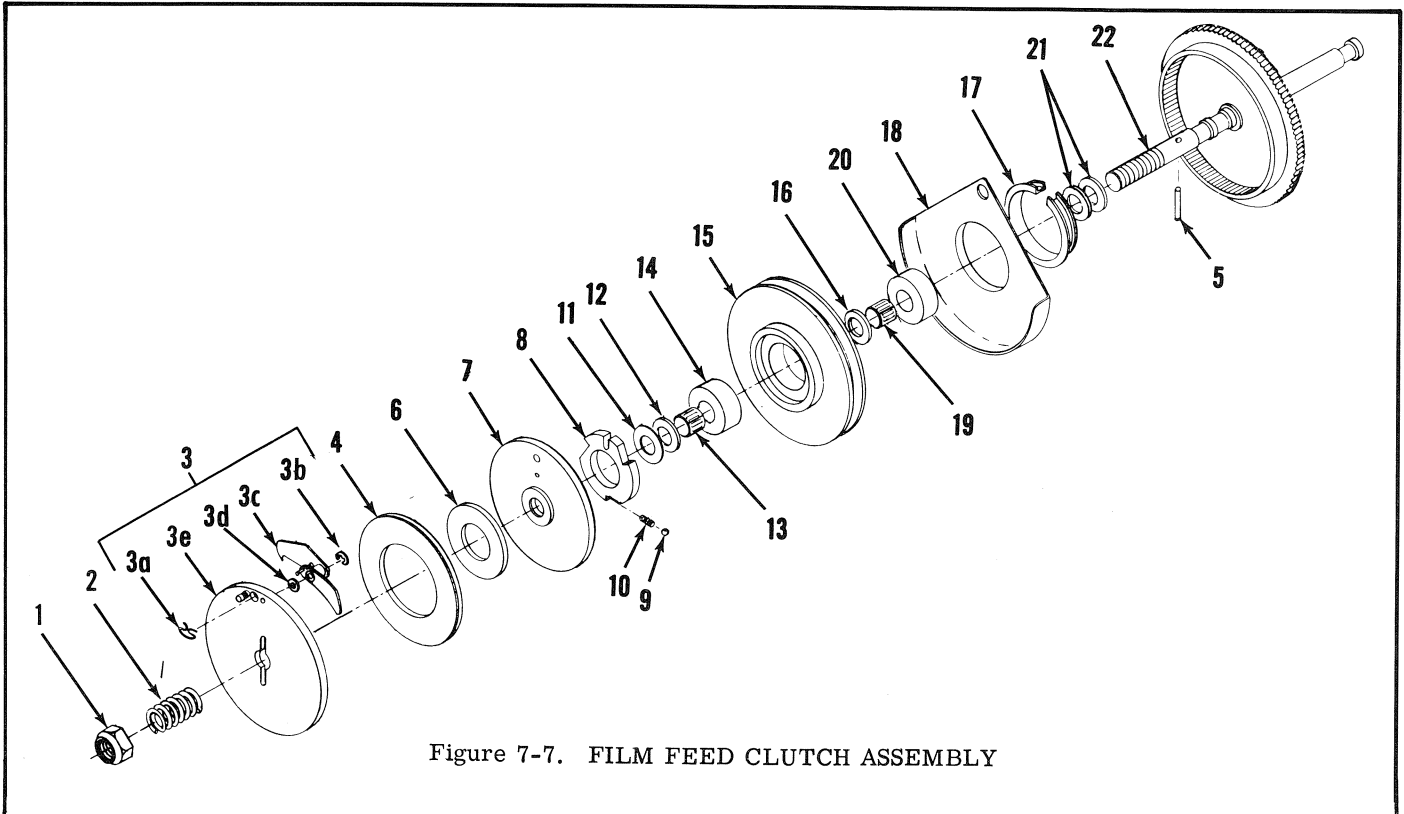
FILM FEED CLUTCH ASSEMBLY
